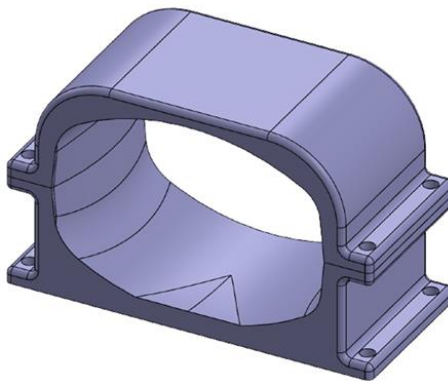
Hard Mount 3D CAD image from 2016 SOLIDWORKS
